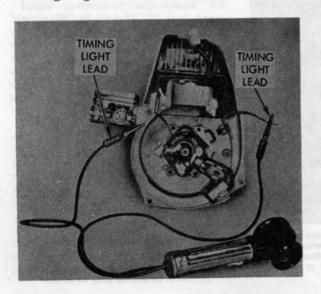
Illustrating proper use of static timing light in adjusting breaker point gap on McCulloch engines.
